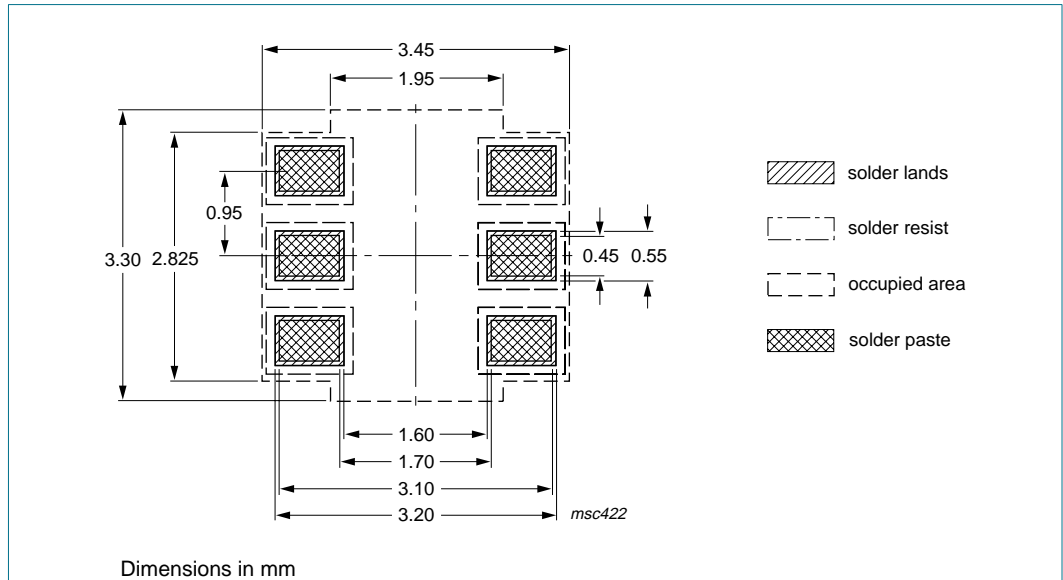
Reflow soldering footprint SOT457 (SC-74)
